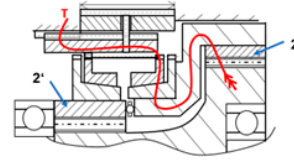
Torque flow while shifting process from 1 to 2 gear (starting gear to high-speed gear).
